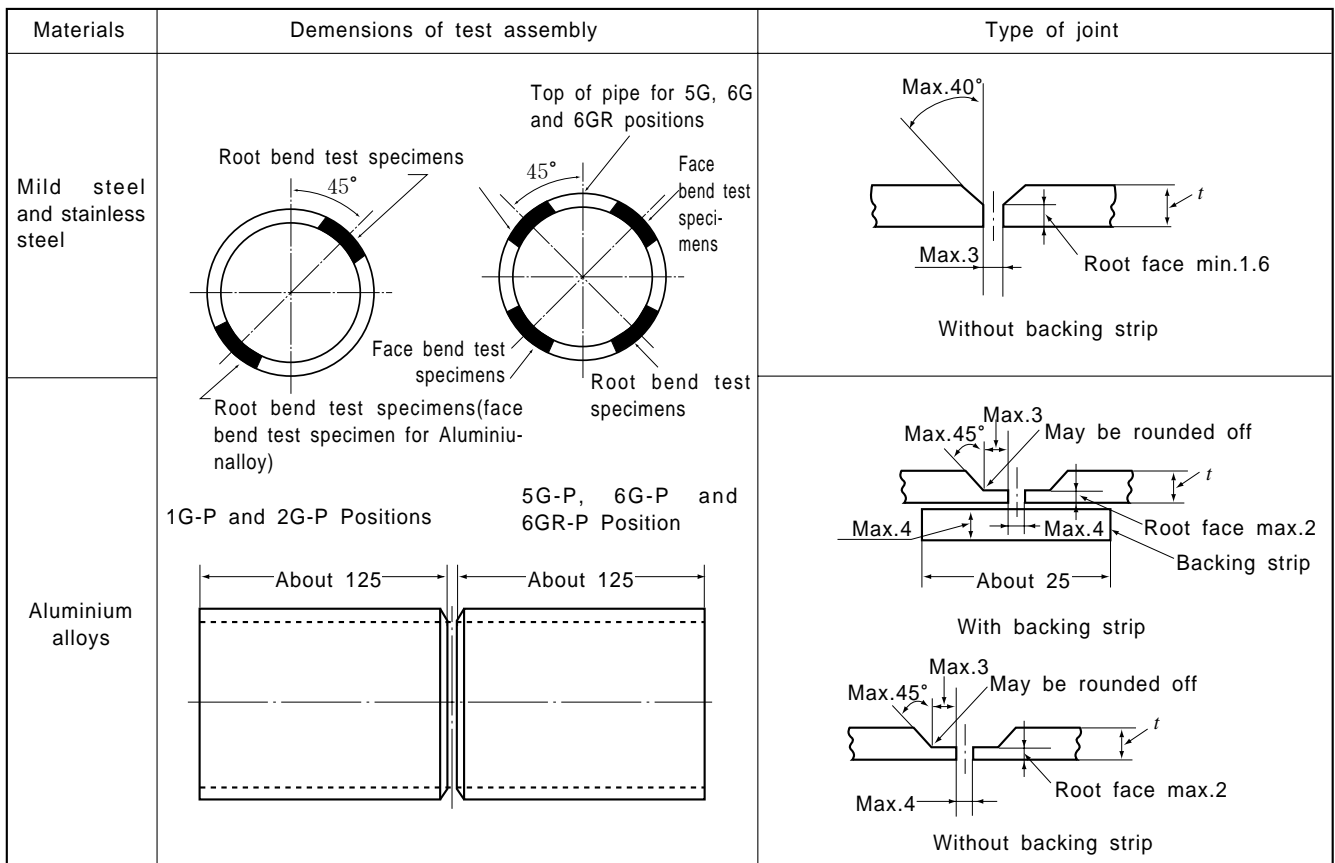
Dimensions and Types of Test Assemblies for Pipes of Grade 1 (unit: mm)
